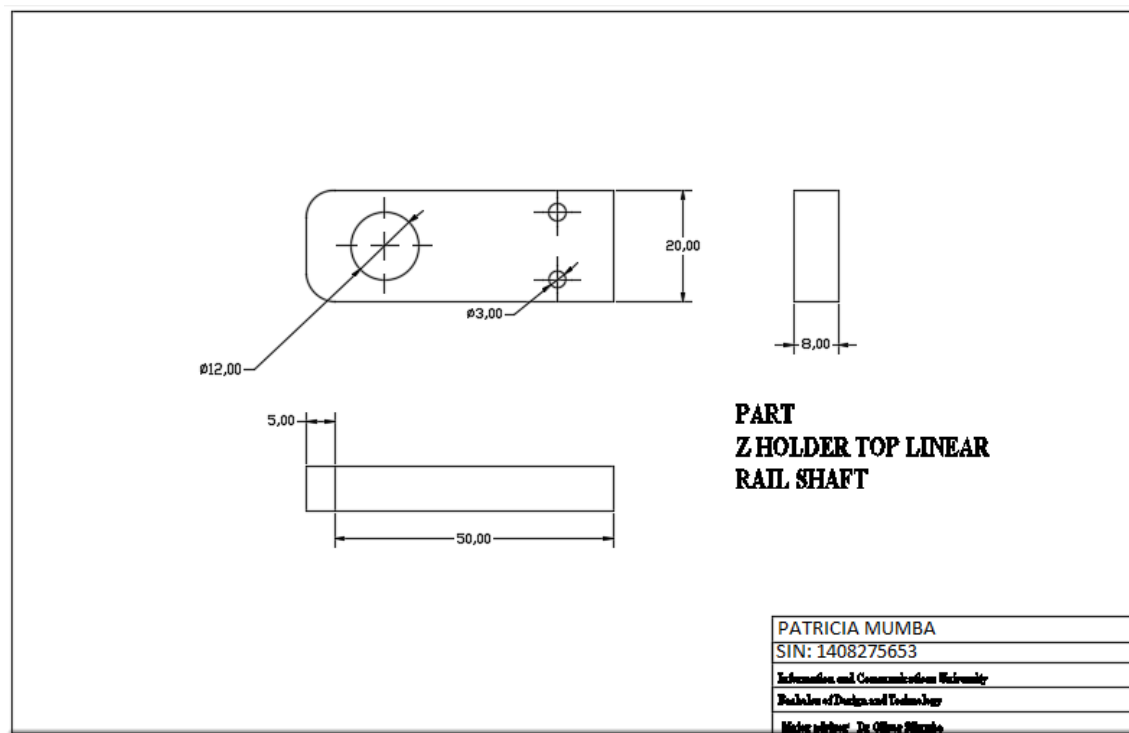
Z HOLDER TOP LINEAR RAIL SHAFT
